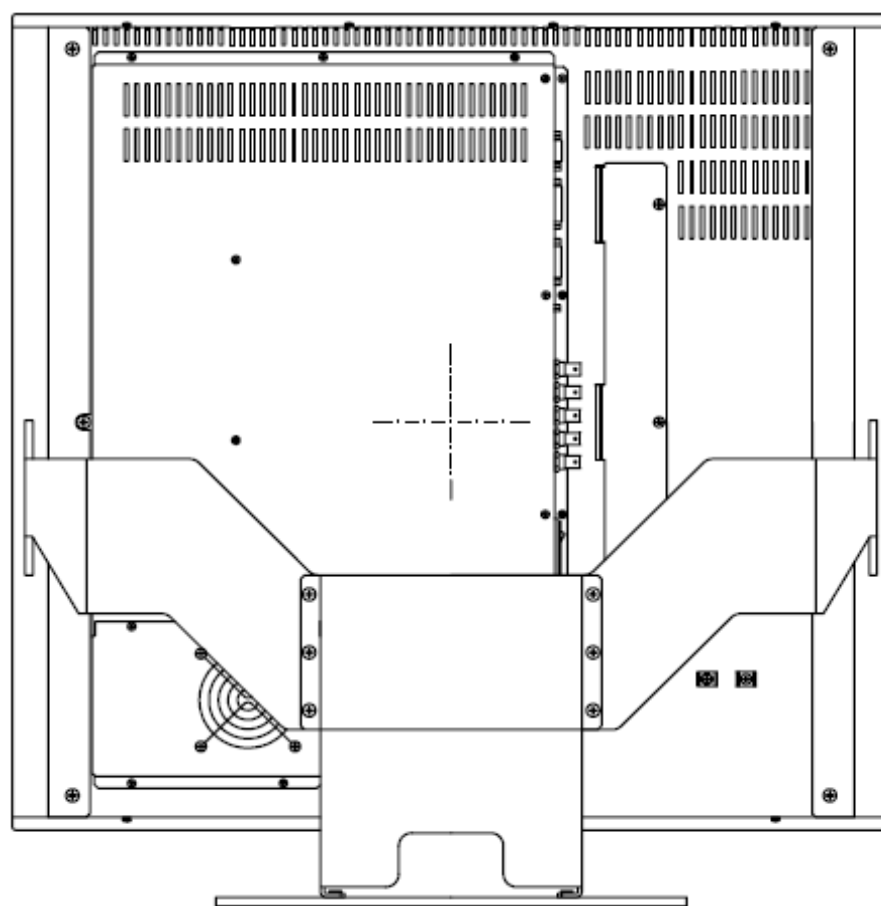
Raptor SQ2801 Dimensions (Desktop version); Rear View
